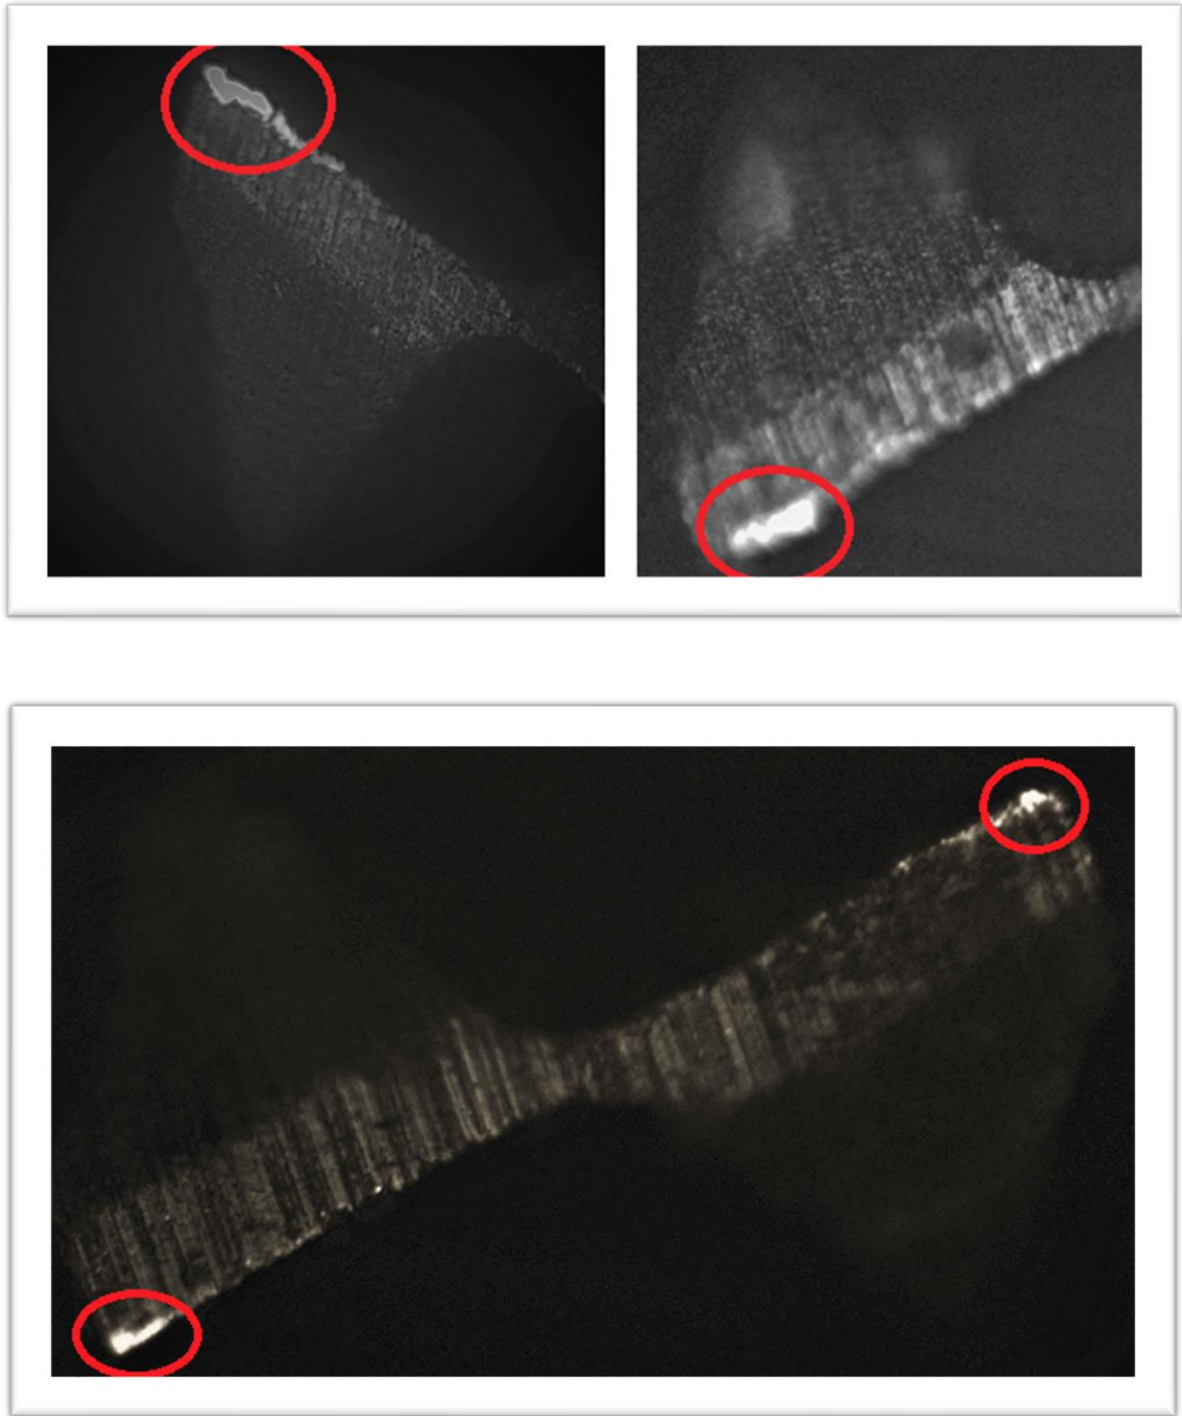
Tool wear of AlTiN Coated Cutting Inserts
